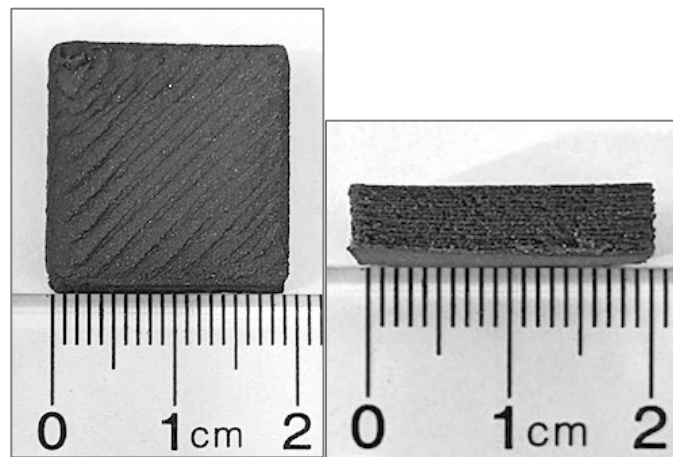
Top View (left) and Side view (right) of Final Printed Sample
